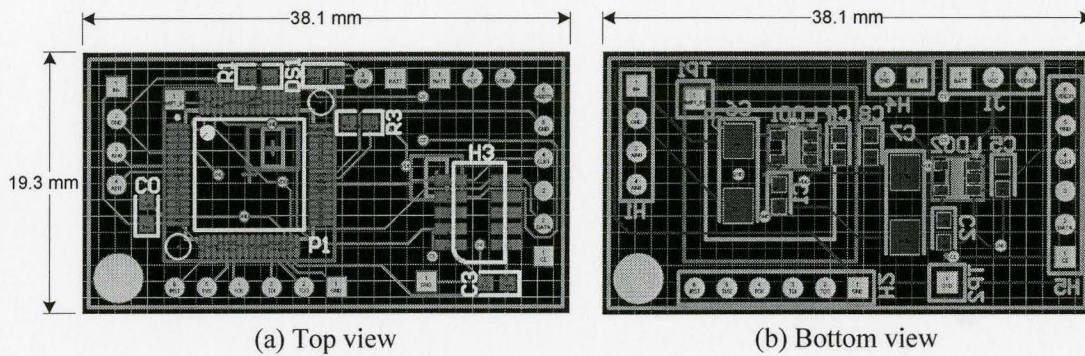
Protel Layout of Prototype PCB; (a) Top view; (b) Bottom view.
